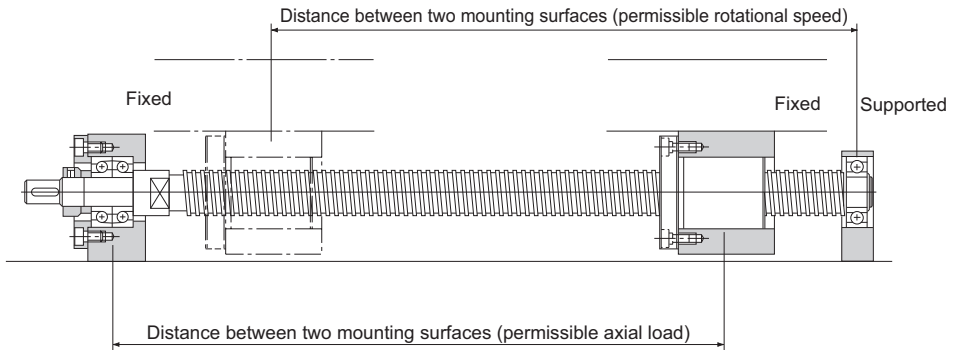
Screw Shaft Mounting Method: Fixed - Supported
